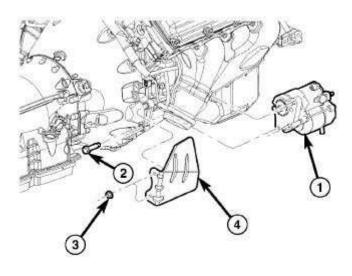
Removing/Installing Starter Courtesy of CHRYSLER GROUP, LLC
